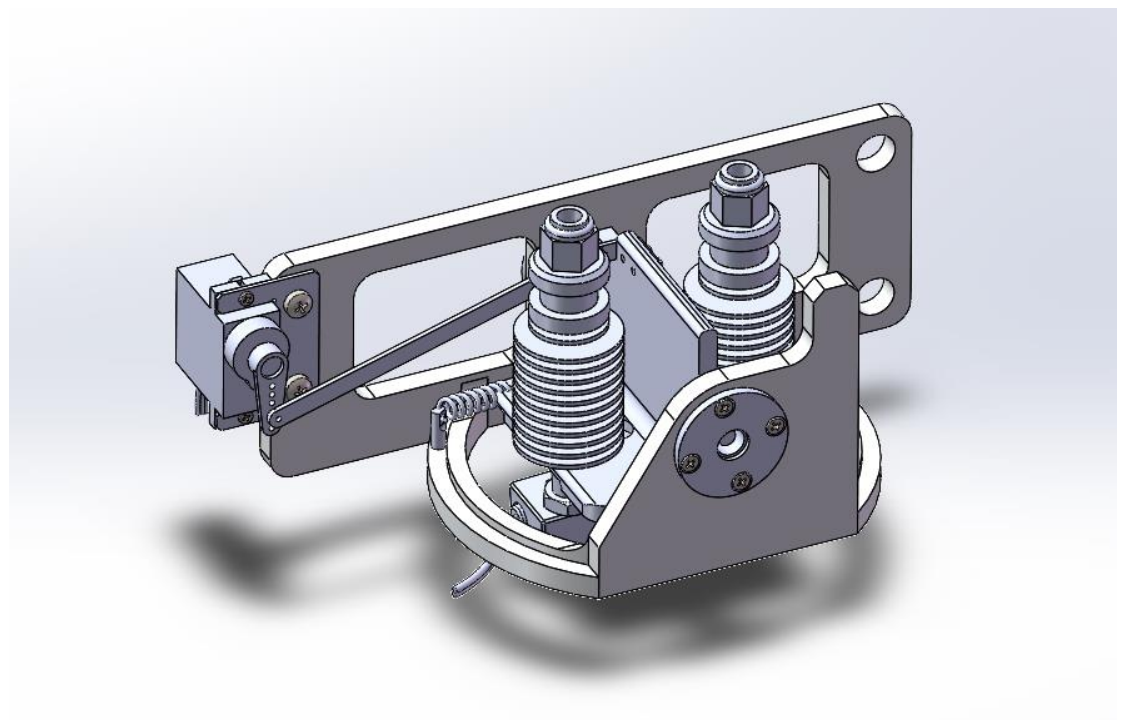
3D model of the print head drive of a two-extruder 3d printer
